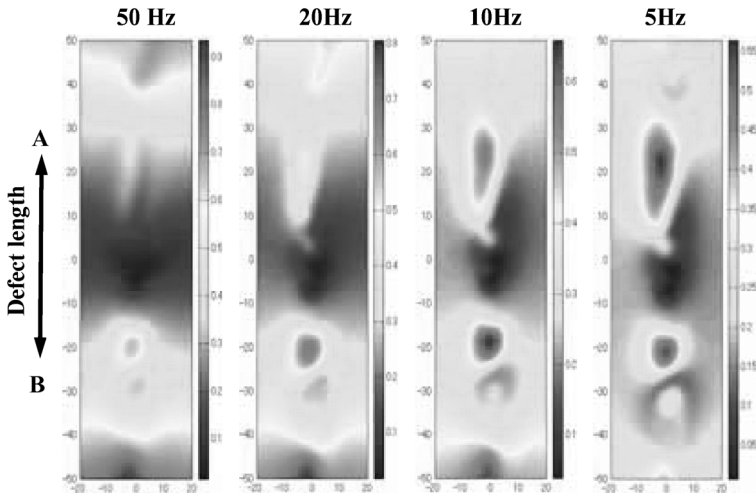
Frequency dependence of magnetic images of the y-component at the welding part
